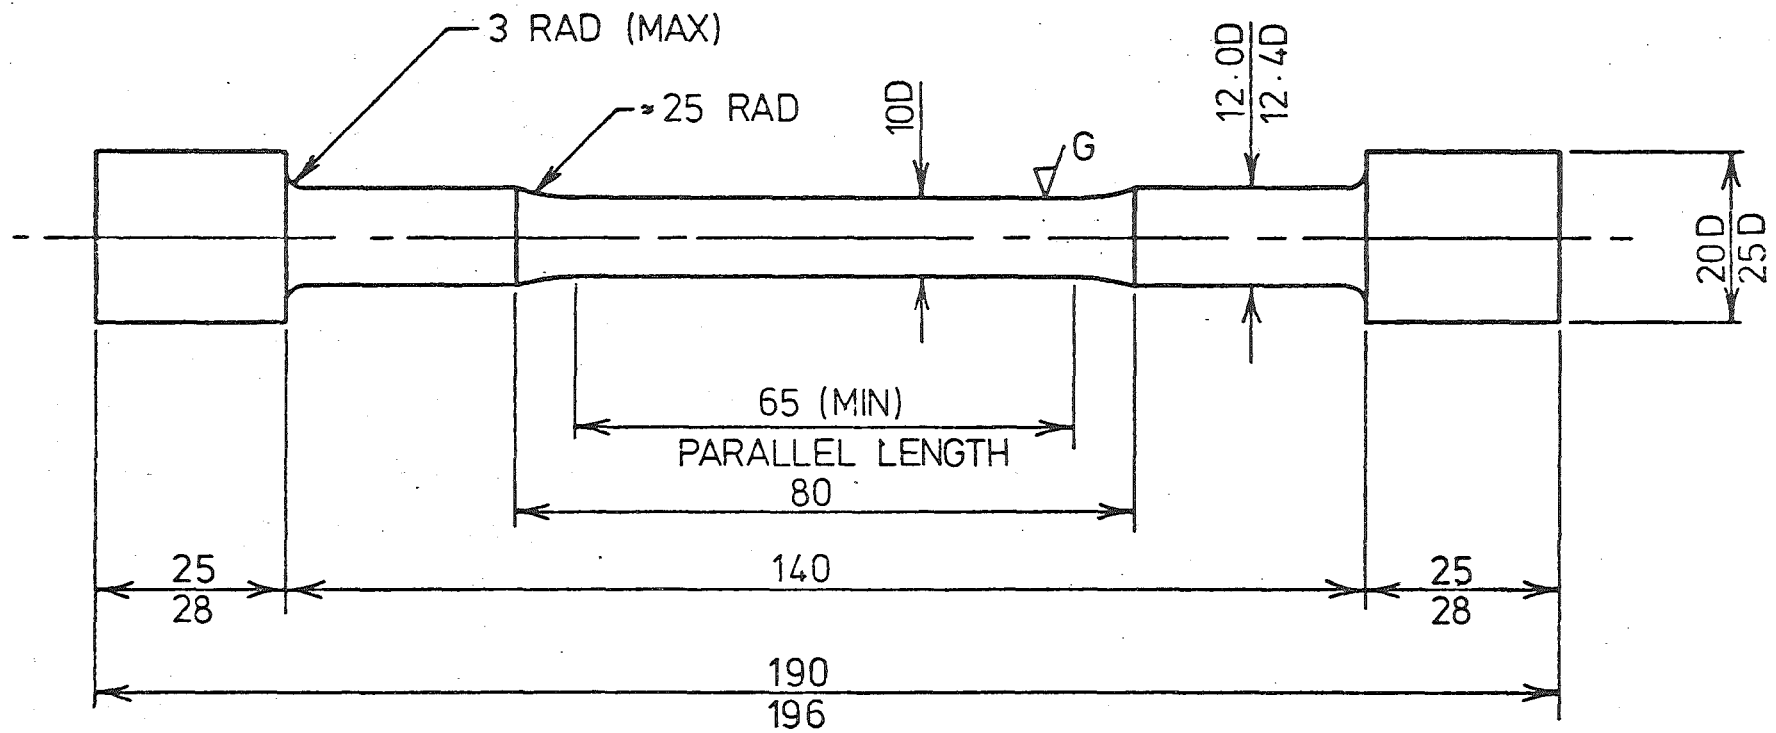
Details of the 10 mm diameter tensile specimen.
